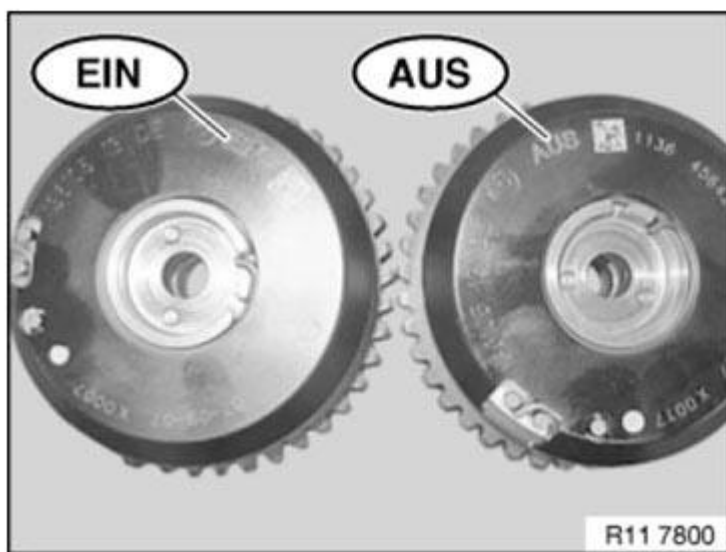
Identifying Intake And Exhaust Camshaft Adjusters Mark
